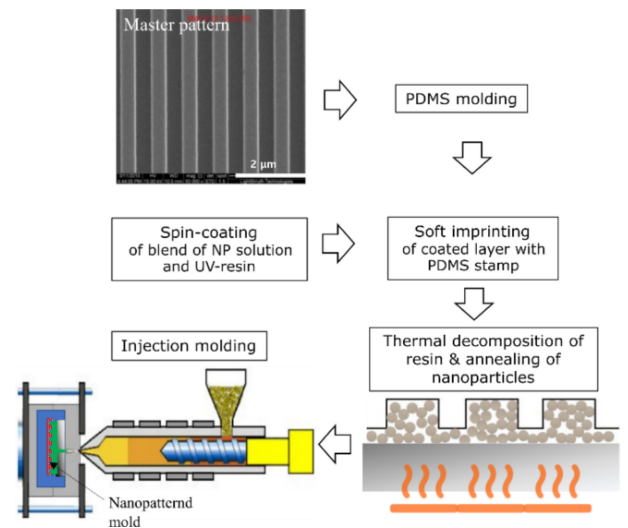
Fabrication of linear grating ZrO₂ mold and application to injection molding
